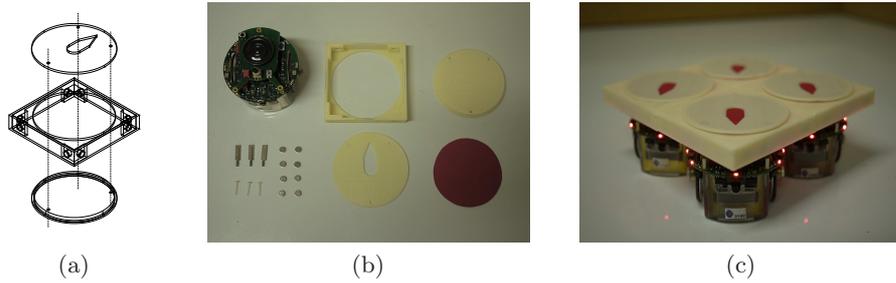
A schematic of the main structural components of the modular e-puck extension (a) and photographs of unassembled (b) and assembled prototypes (c).
